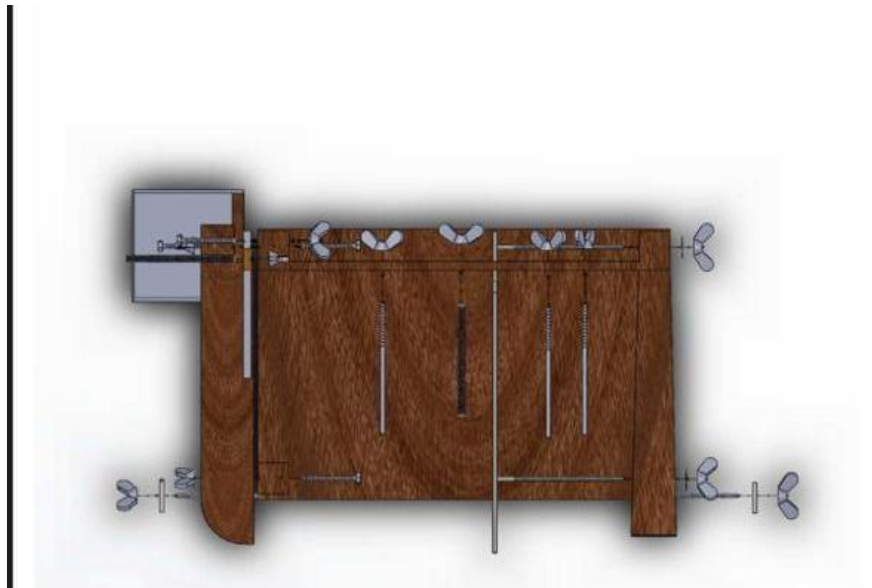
Anthropometric Chair Assembly (Top View)
